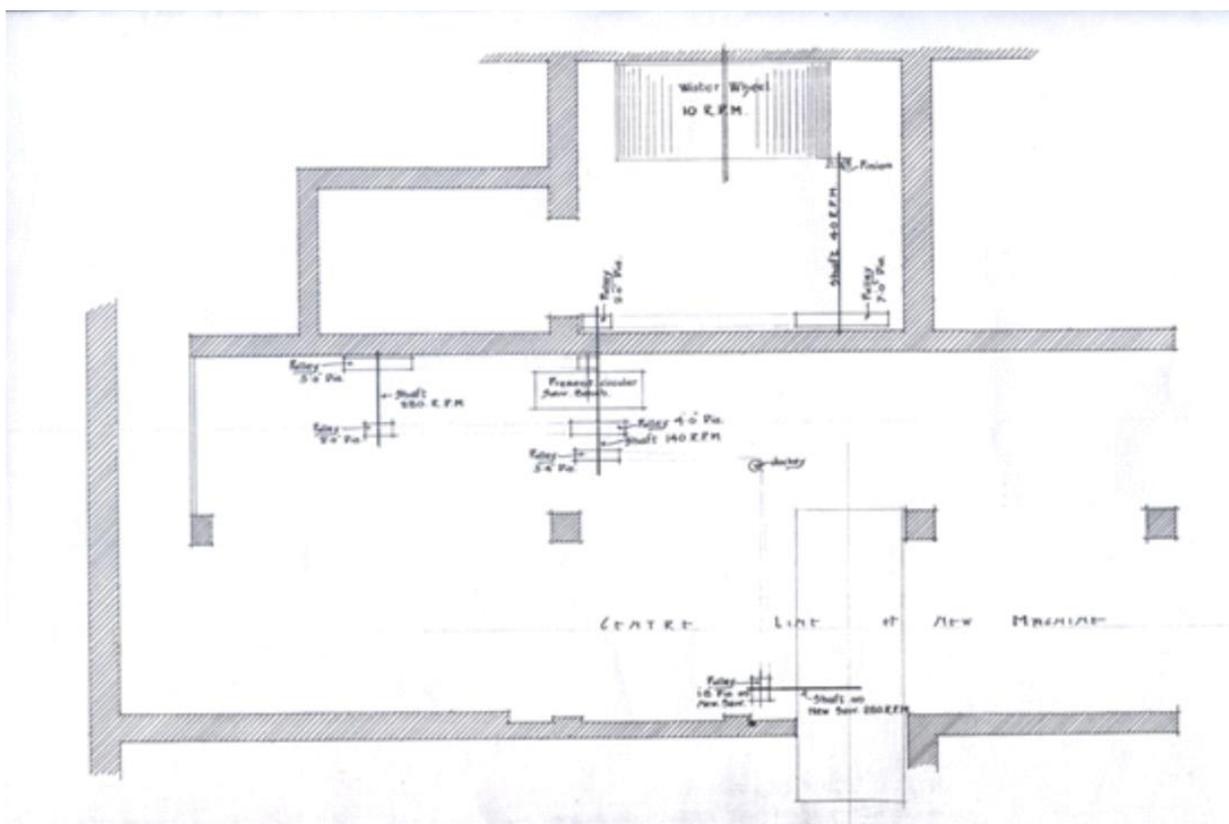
Plan showing re-arrangement of machinery.⁴²⁸ (1909)
